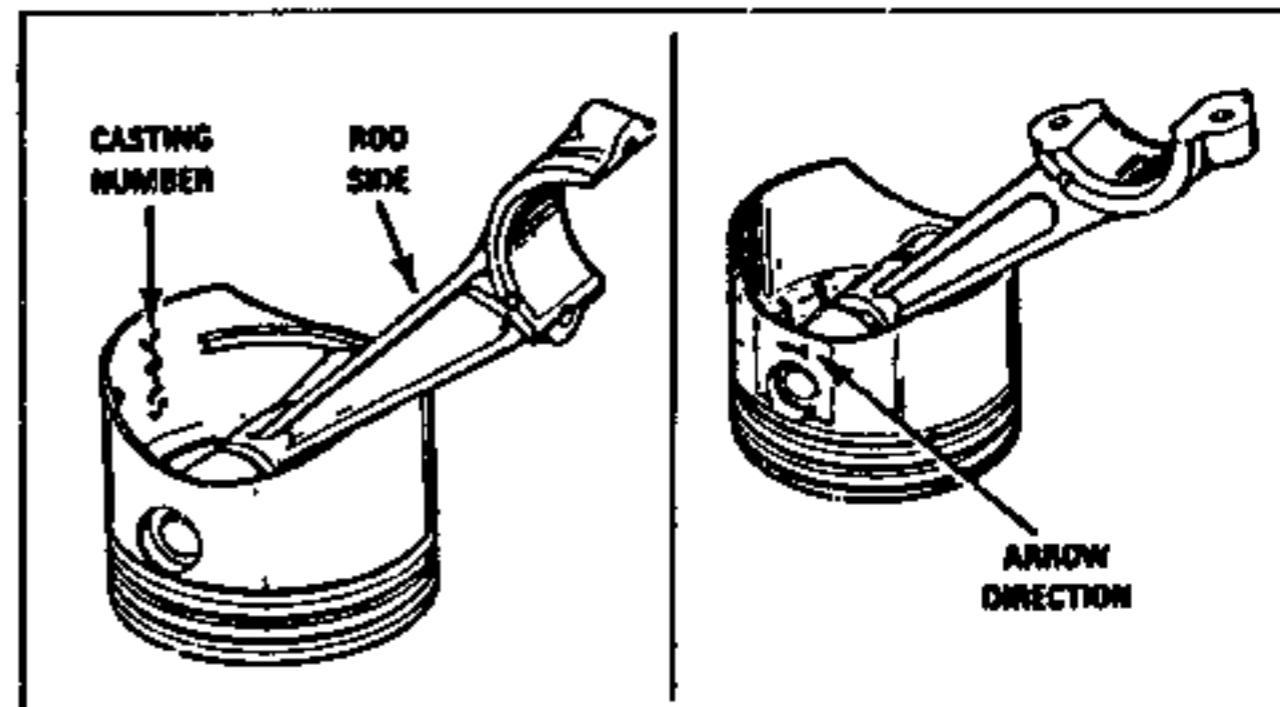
A—On Models VM70, HM70, HM80, HM100 and VM100, install piston on rod with arrow or casting number positioned as shown.
